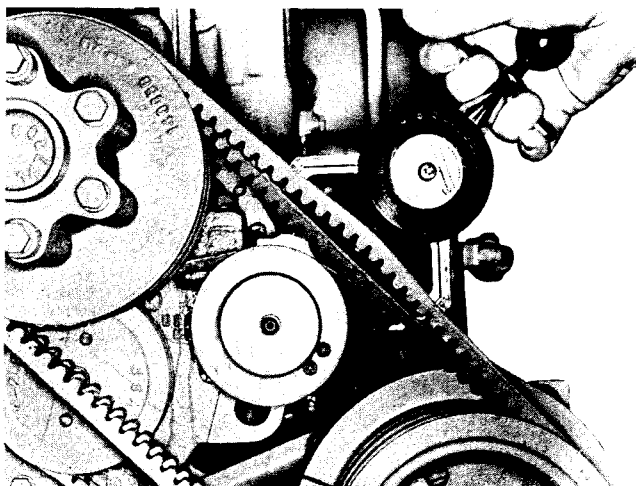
(N11977) Checking belt tension with ST-1138
